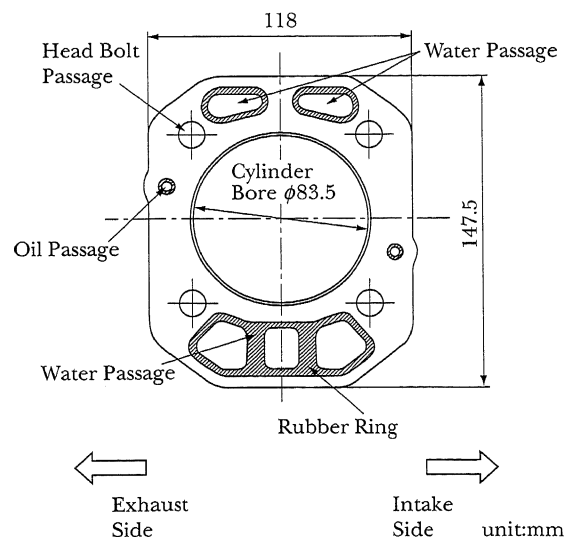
(b) Shape and Dimensions of the Test Cylinder Head Gasket (Soft Facing Gasket Flat Core, Metal Gasket)
